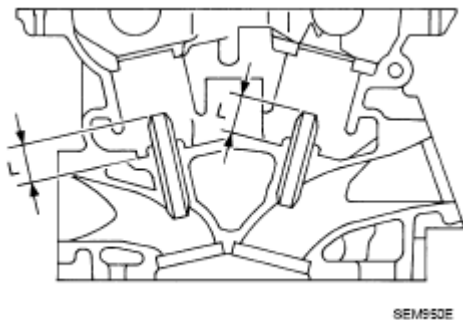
Identifying Dimensions For Pressing Valve Guide From Camshaft Side
